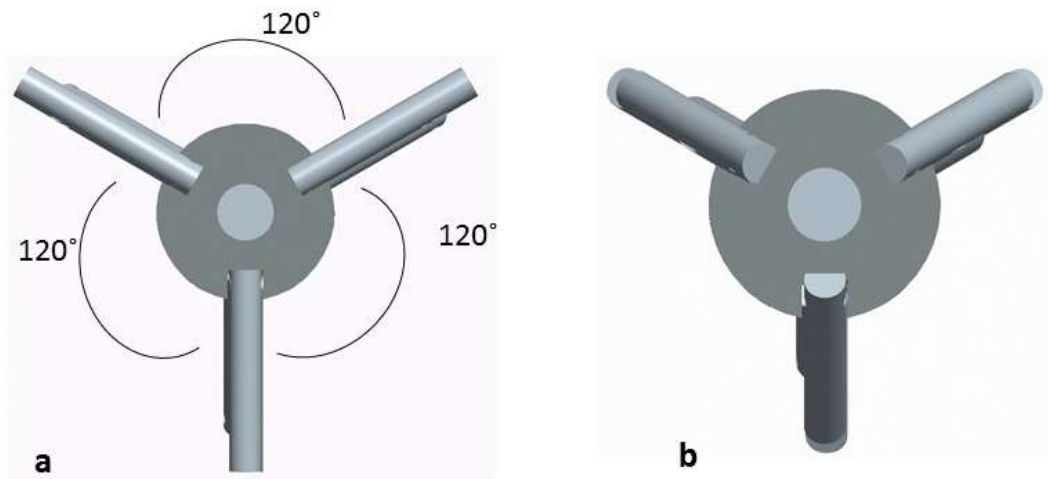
Top view of the device showing the arrangement of the spokes in (a) expanded and (b) unexpanded form.
